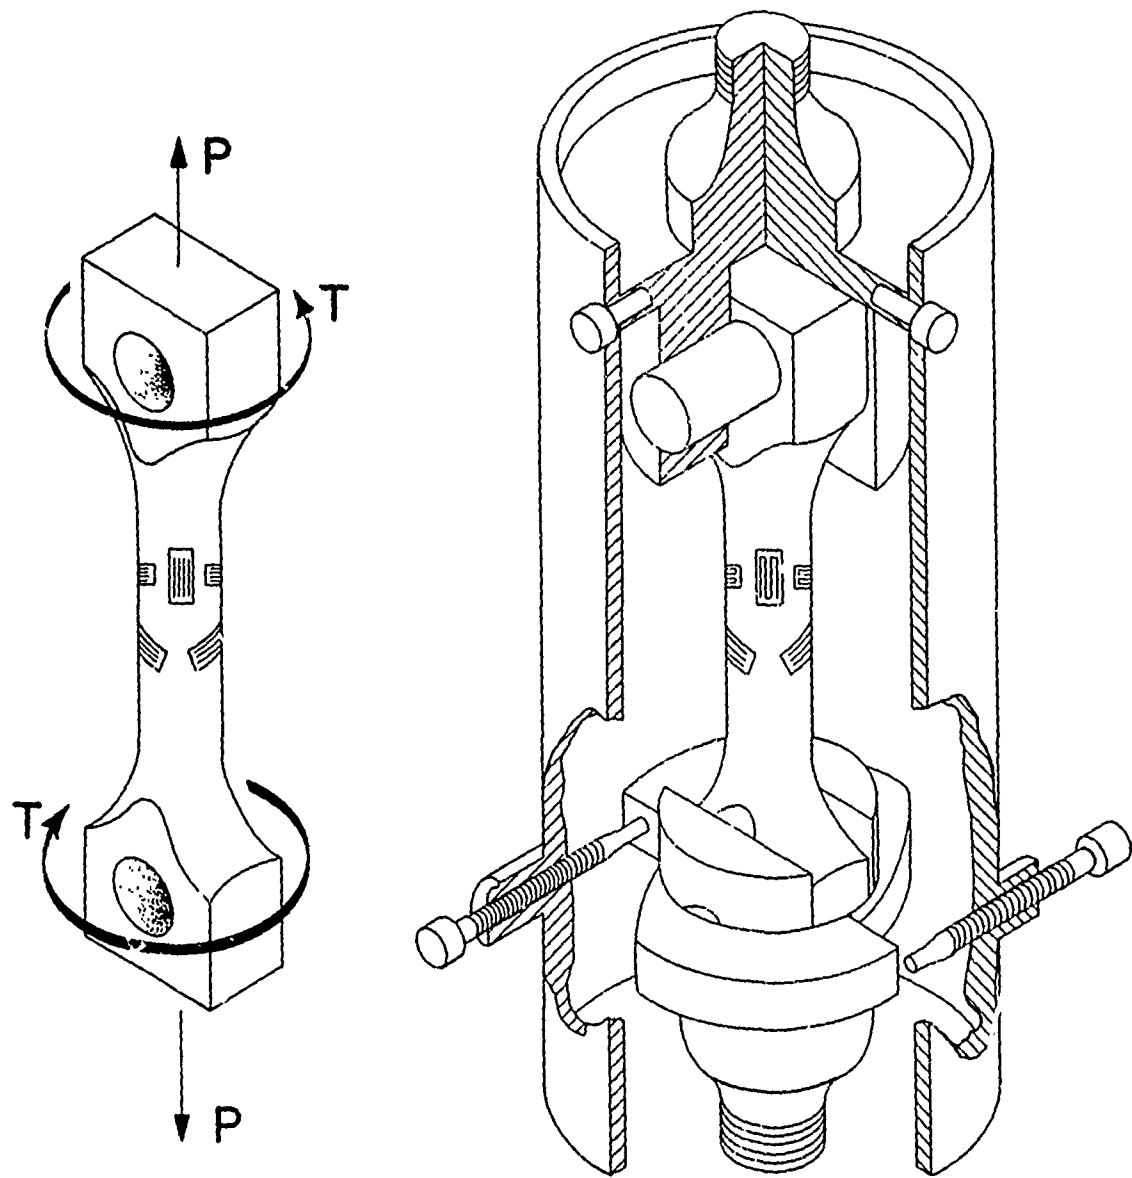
Tension-torque transducer is shown assembled in the calibrator on the right
